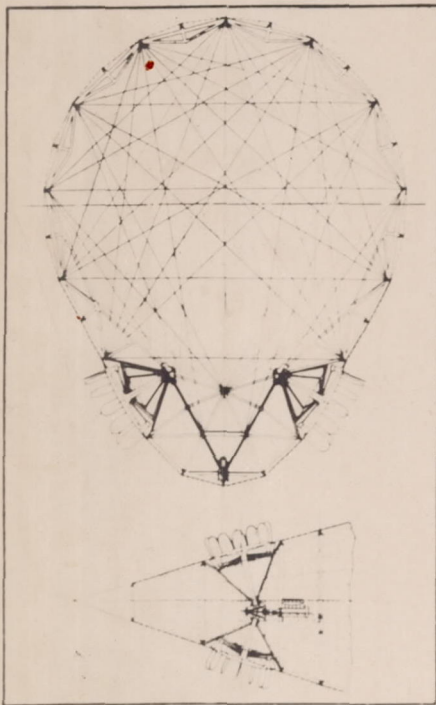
Cross-section amidship and longitudinal section at stern, showing the installation of the K-B propellers.
